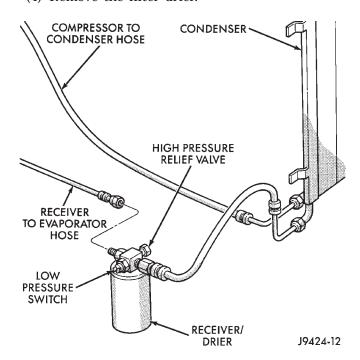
Condenser and Filter Drier—LHD 4.0L Engine
